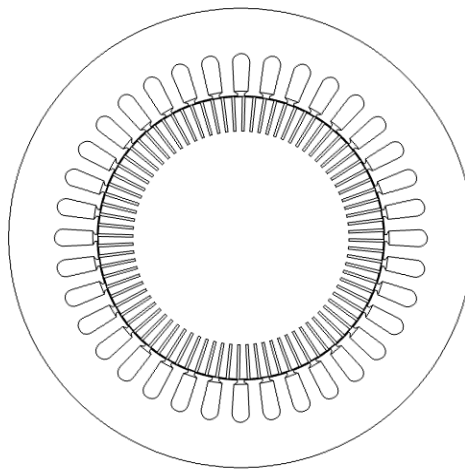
2-D cross-section of machine built in SolidWorks™
